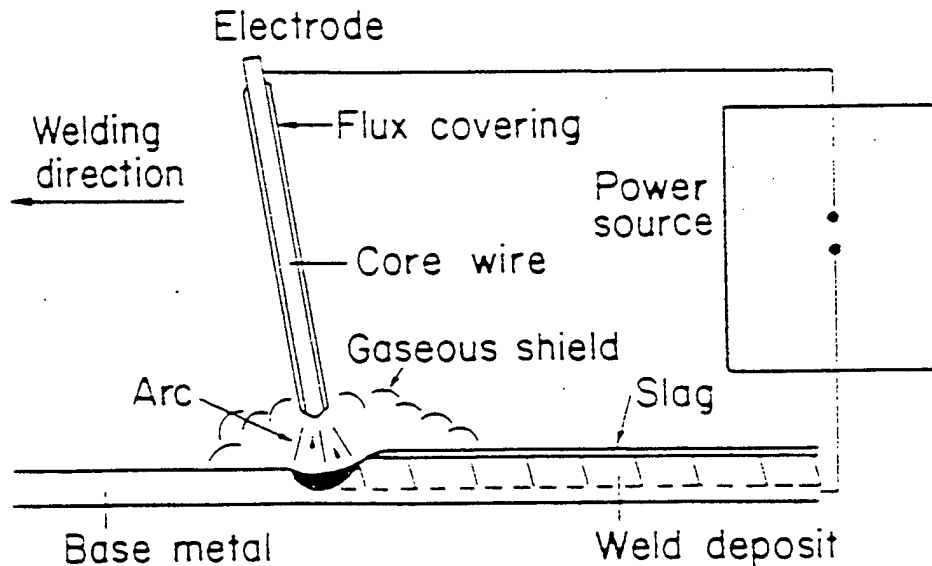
Sketch of the shielded metal arc welding process [Ref. 6]
